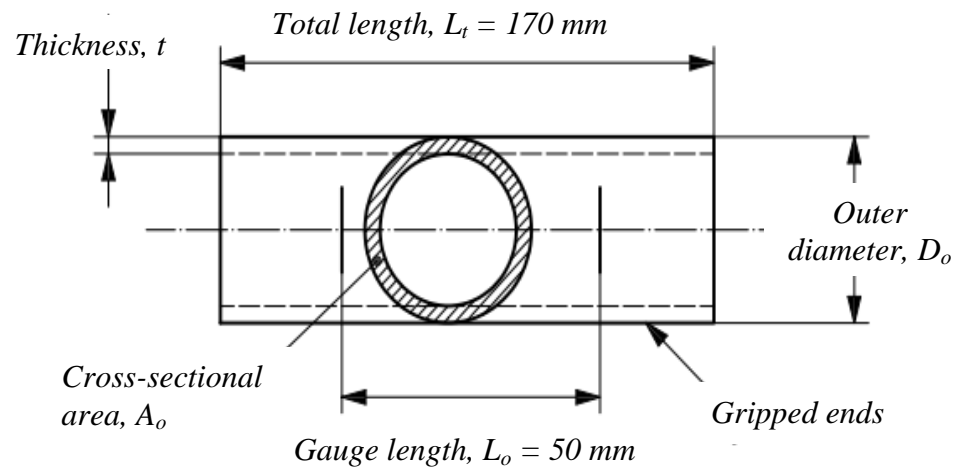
Test piece comprising a length of tube for tensile testing.
